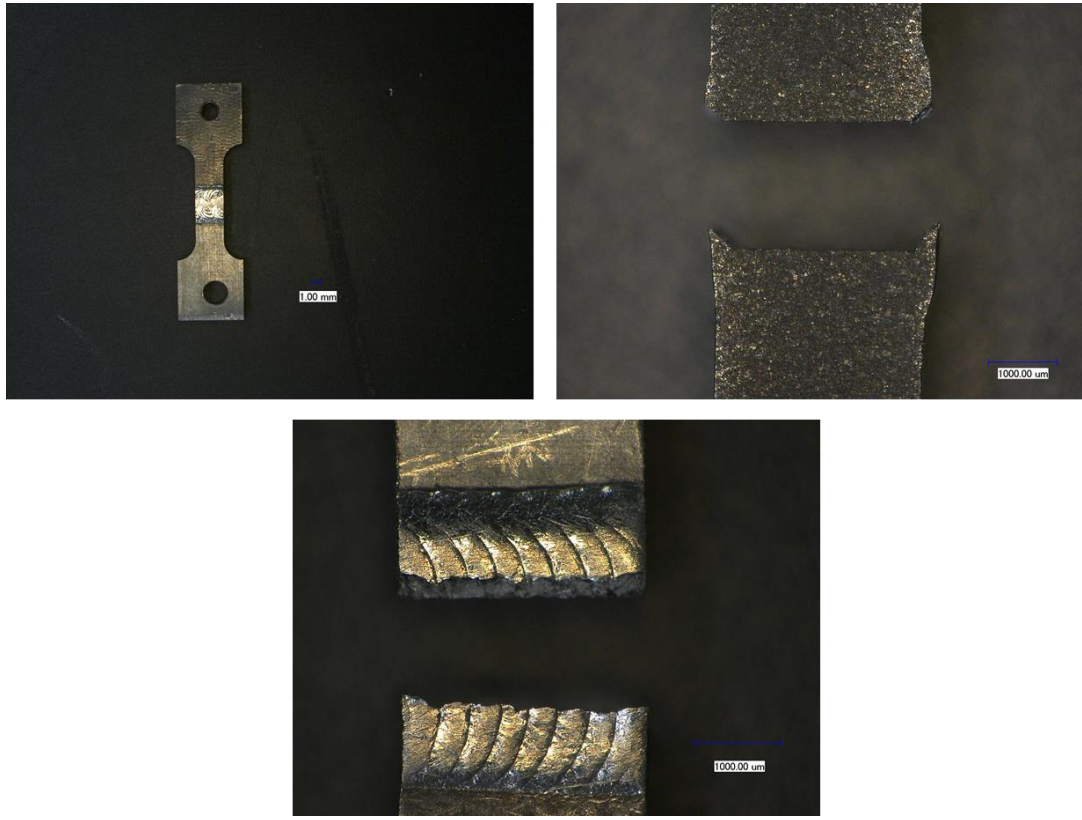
Seam Welded Sample Before and After Tension Test
